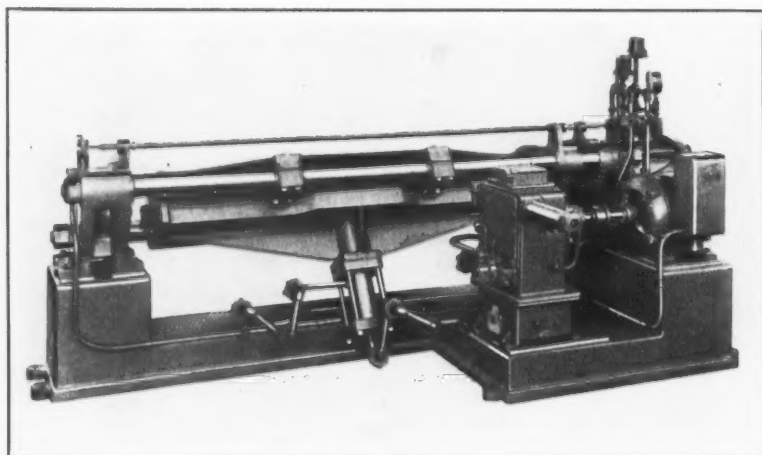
Another Truck-axle Assembling Press in which the Base and Work-fixture are of Welded-steel Construction
